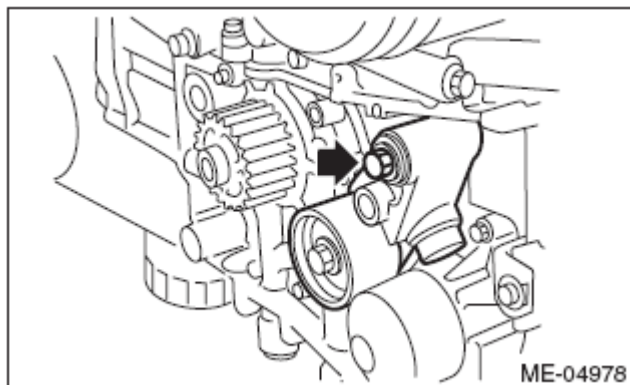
Locating Automatic Belt Tension Adjuster Assembly
